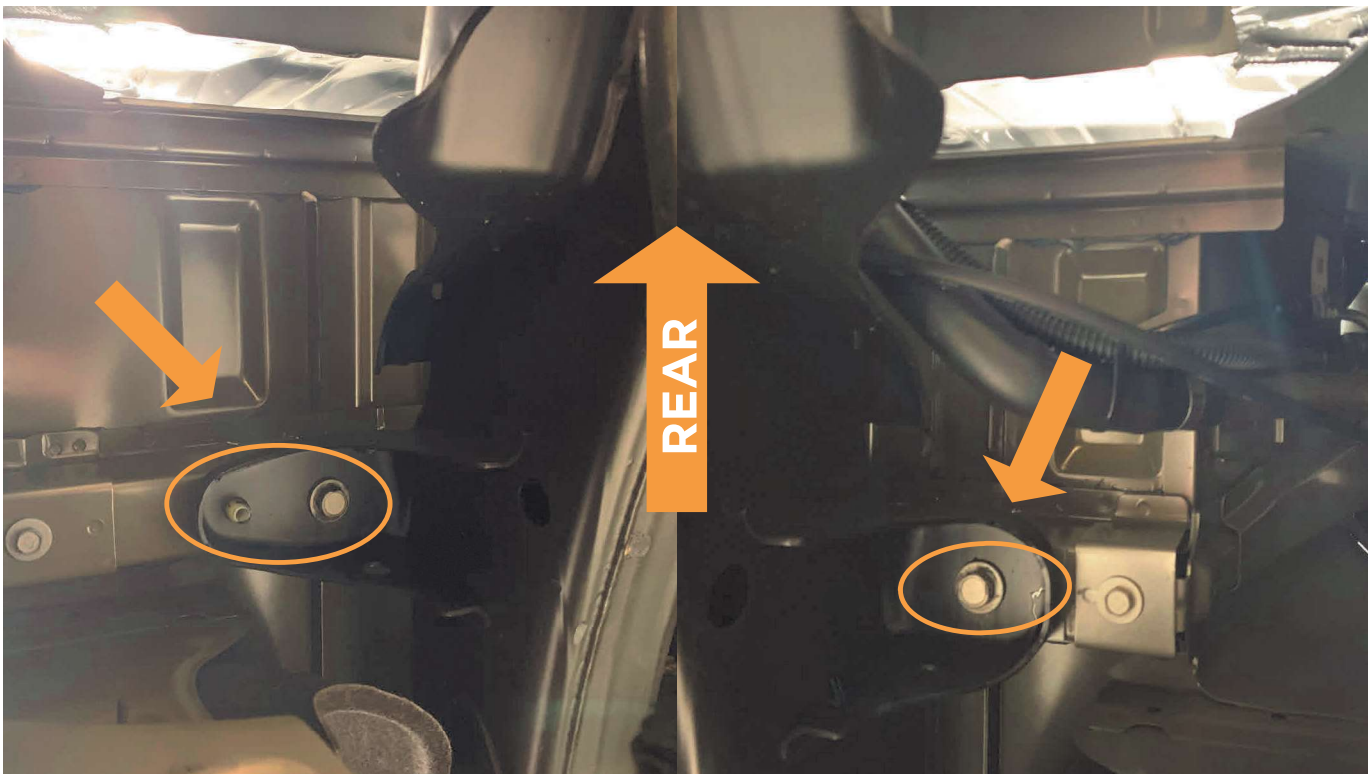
(Left) driver side, (Right) passenger side. (70-inch bed shown).
